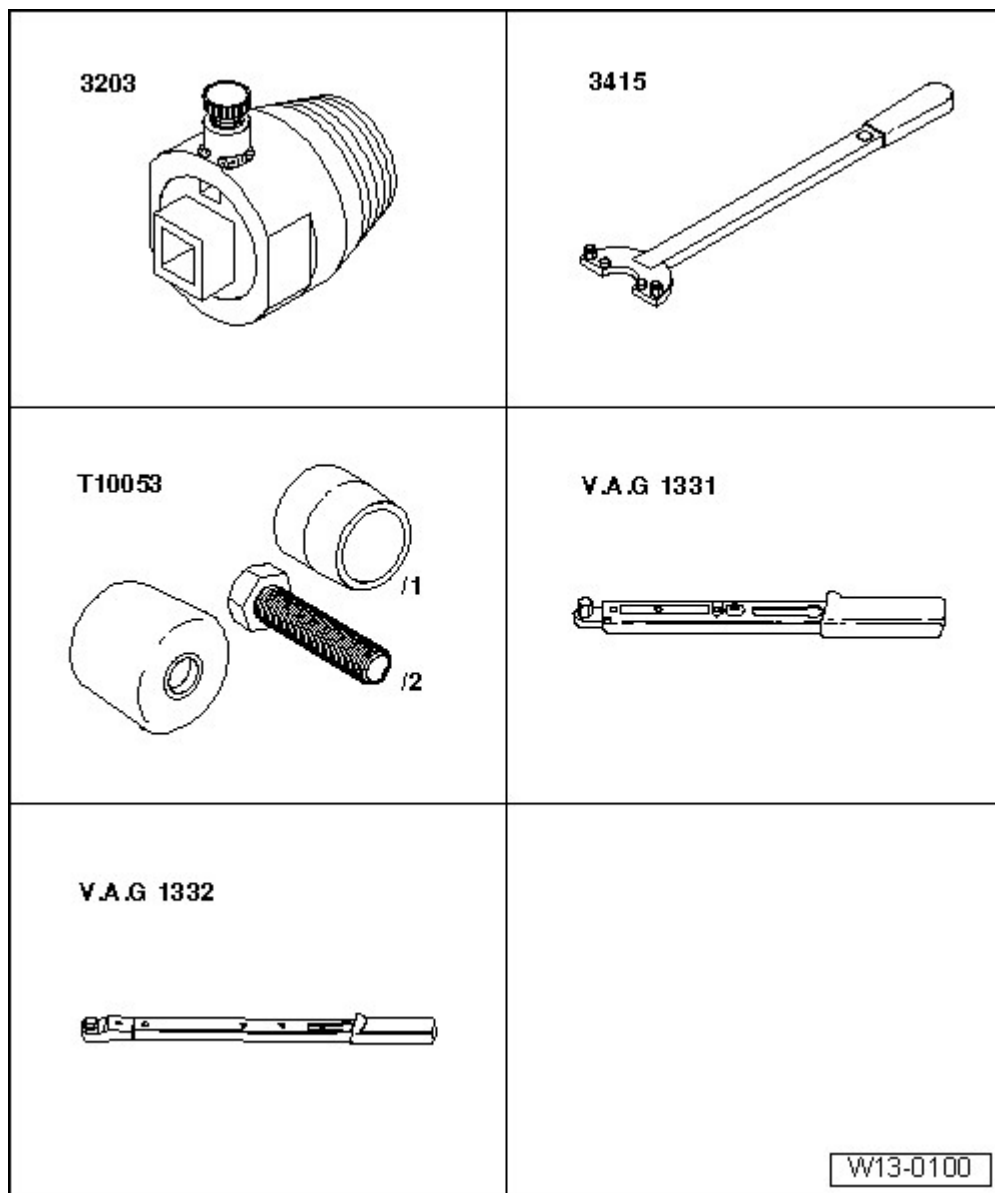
Identifying Special Tools - Crankshaft Oil Seal - Belt Pulley End, Replacing (For PTFE Seals)
